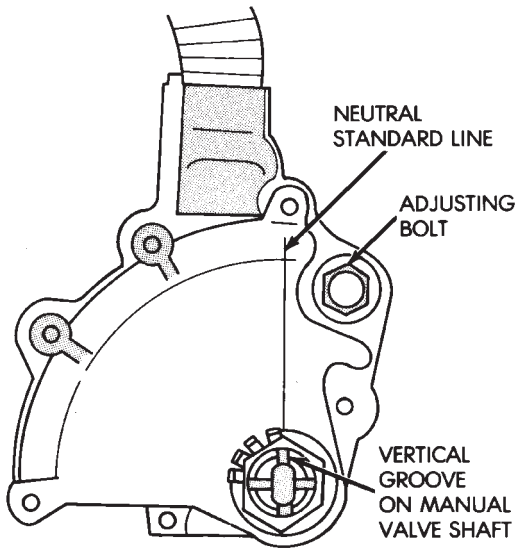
Park/Neutral Position Switch Installation/ Adjustment
